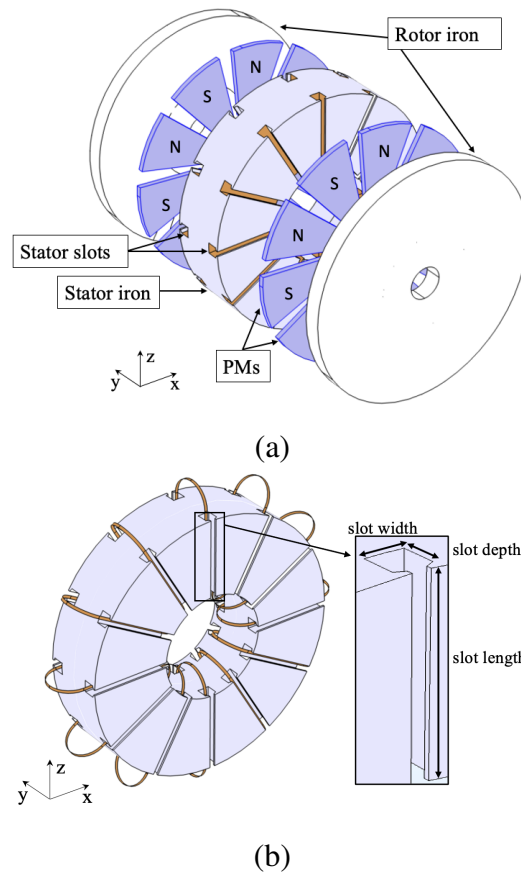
10-pole 12-slot toroidal AFPM machine geometry, (a) exploded view: stator iron (grey), PMs (blue) and rotor iron (white), (b) representation of the AFPM stator with toroidal core wound coils.
